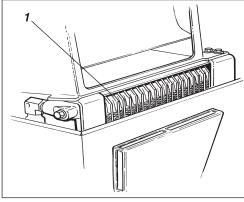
Engine compartment 1. Hydraulic fluid cooler
